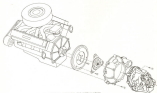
FIGURE FORMER GEAR AND MOTOR UNIT
